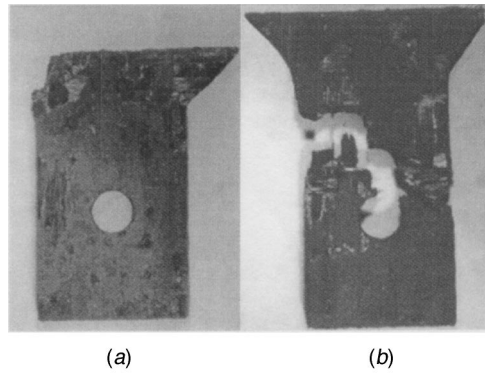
Damage of fasteners after removal from the sector rig
